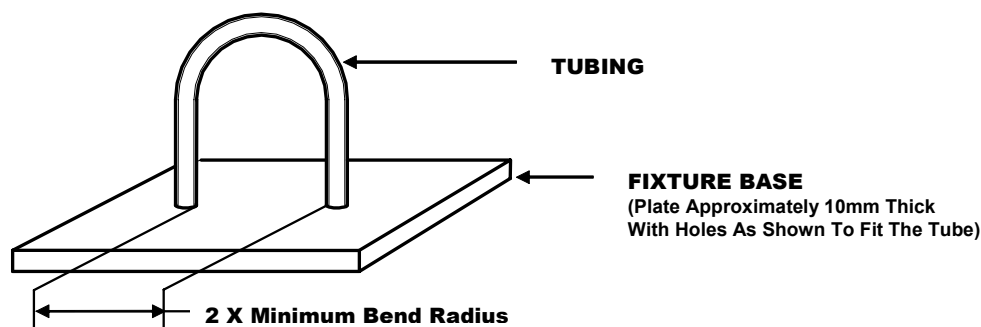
KINKING RESISTANCE TEST FIXTURE
